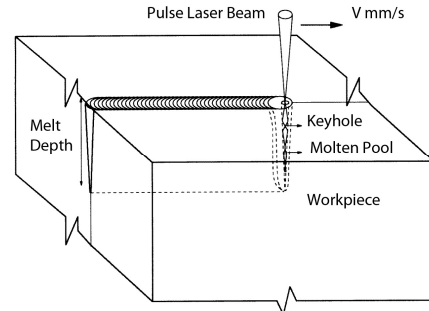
Schematic of keyhole, melt depth and molten pool in pulse laser welding.
